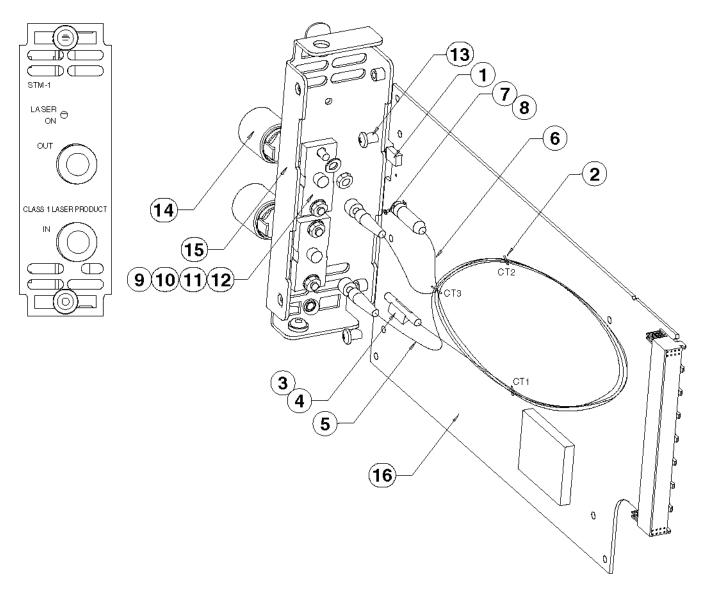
1310 nm STM-1/4 Optics Module - Exploded View
